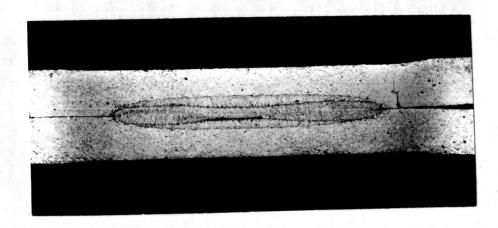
Cross-sectional view thru the centerline of spot weld No. 5 (see Fig. 1). The load was applied to the top sheet and directed to the right. The four fine cracks are not readily visible in this photomicrograph (see Fig. 7). Radiographic inspection detected a slight indication of a crack.
